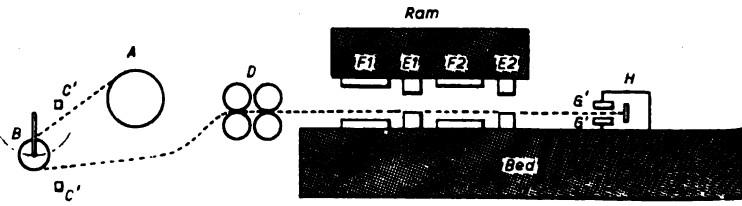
Diagram of the core cutting machine. A, Unwind coil; B, Jockey roll; C, C', Photo-electric cell; D, Feed and reverse tension rolls; E, Mitre cutting tools; F, Punches; G, G', Photo-electric cell; H, Travel limit micro-switch
